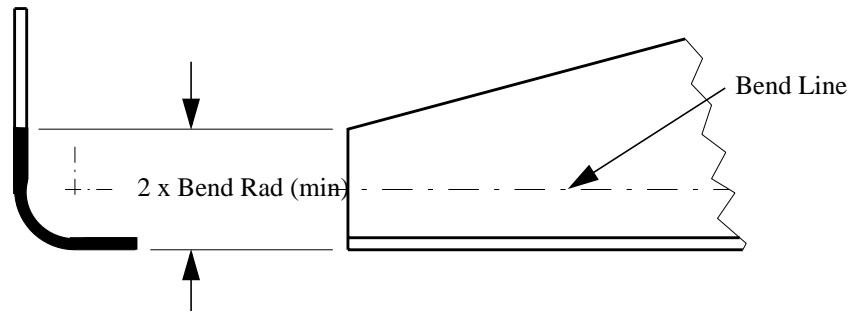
BENDING DESIGN USING SHEARED BLANKS
